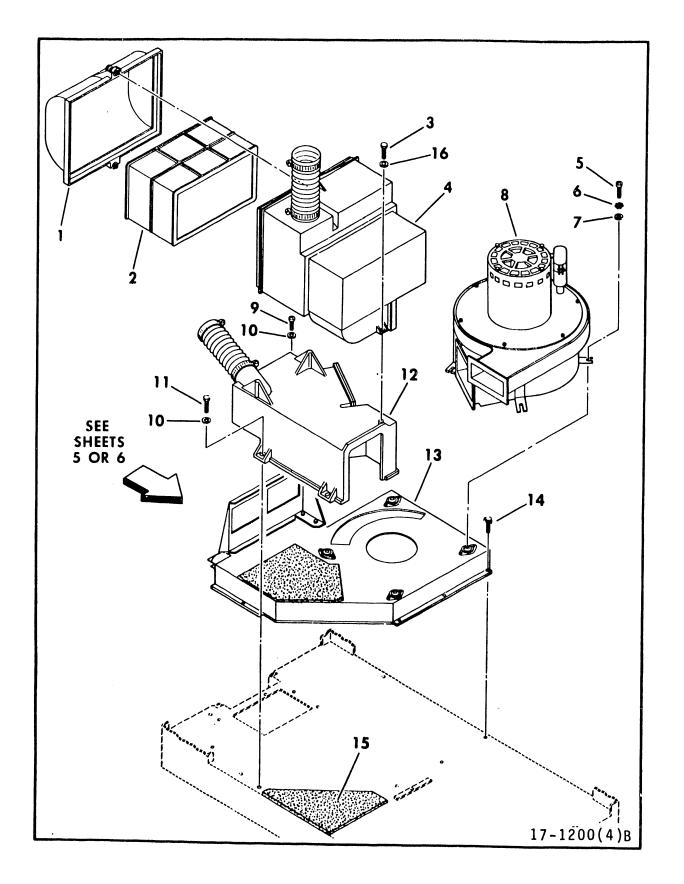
A-12. Frame and Air Assembly (Sheet 4)
